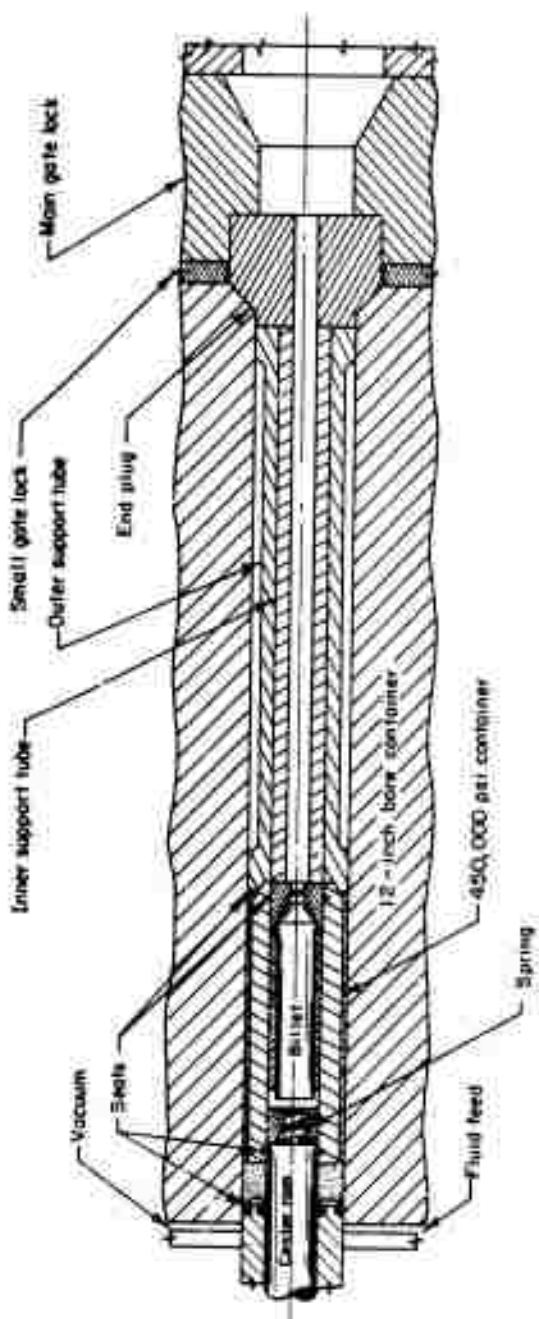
FLUID-TO-AIR EXTRUSION WITH 450,000 PSI CONTAINER
